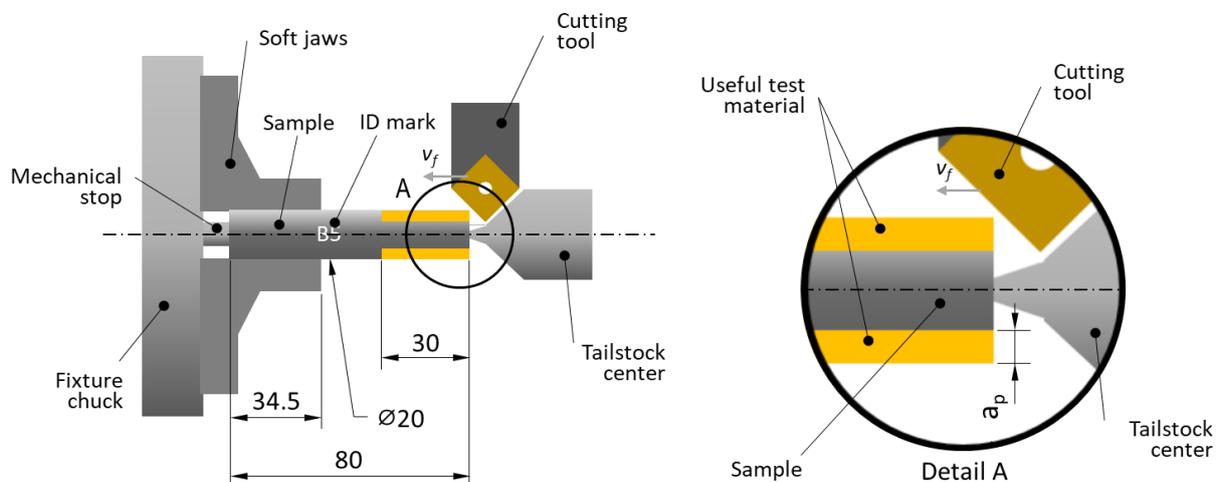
Adopted setup for chip type and form testing. Dimensions in millimeters.
